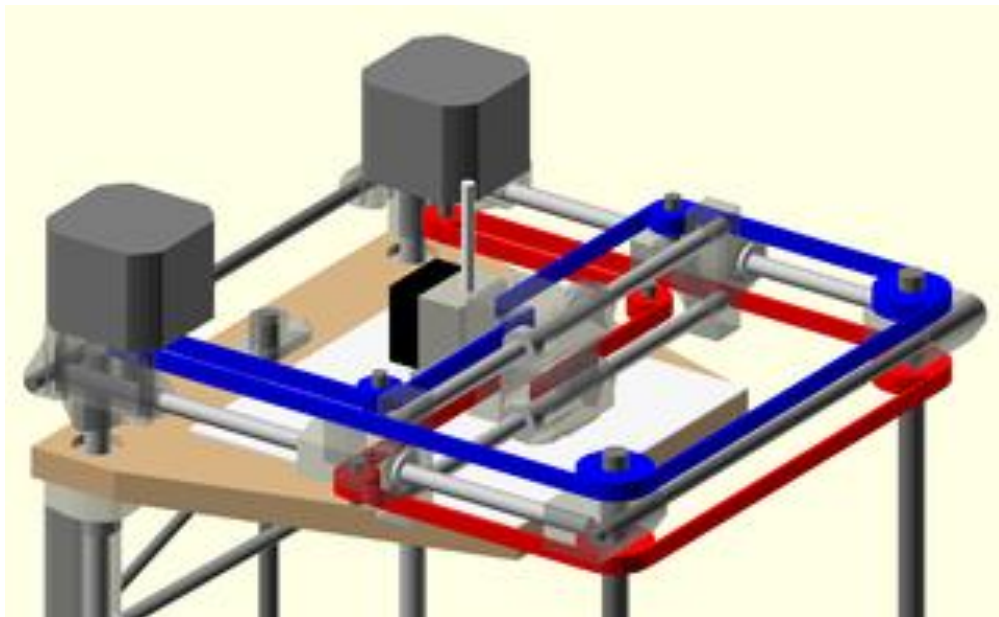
shows the belt connection and working method of a core X-Y Cartesian 3D printer. [51]
